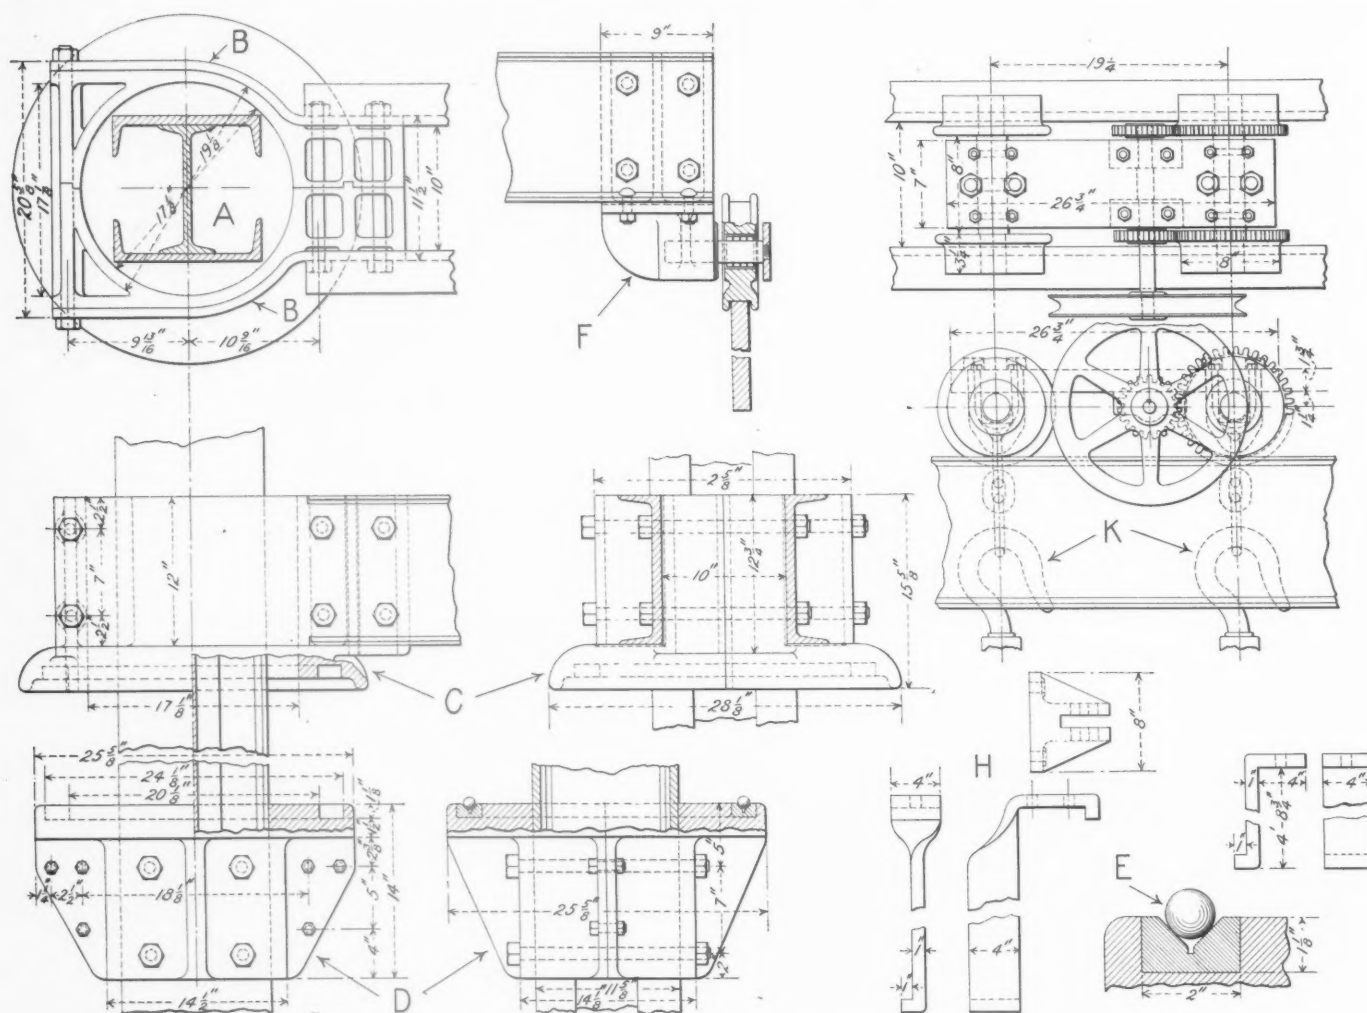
Details of Column and Full-Swing Jib Crane Arrangement
